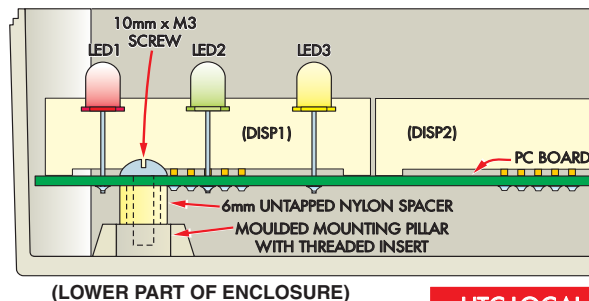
the display board is mounted inside the case on 6mm untapped nylon spacers and secured using M3 × 10mm machine screws.
